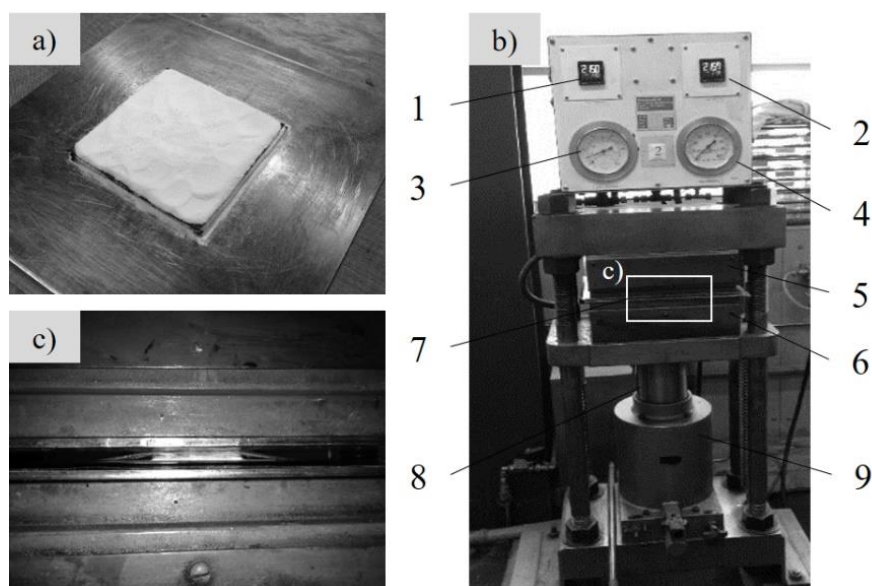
a) Stacking set of knitted reinforcements and MPs; b) hydraulic hot press and parts description (1- Top thermo-controller, 2- Bottom mold thermo-controller, 3- Top mold hydraulic pressure indicator, 4- Bottom mold hydraulic pressure indicator, 5- Dynamic top mold, 6- Fixed bottom mold, 7- Sample, 8- hydraulic jack, 9- Manual mold pressure controller)
